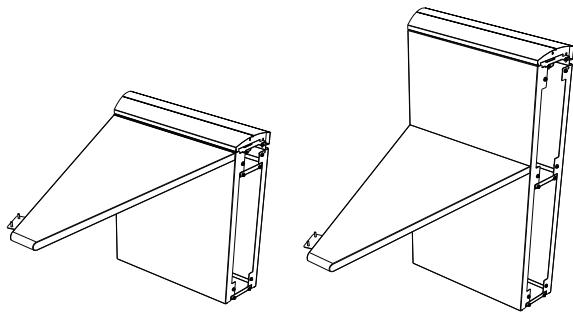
The WorkCenter 30° Wedge Section, with and without a Back Wall
